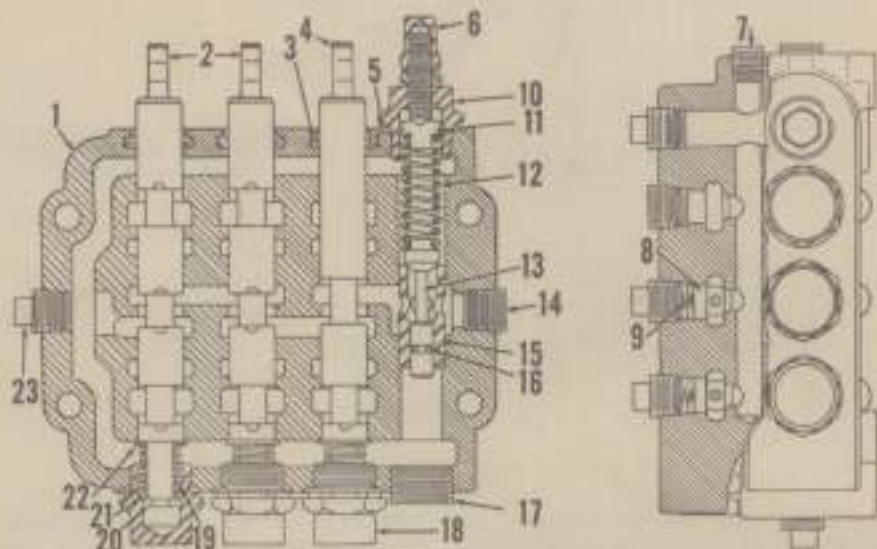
Cut-away view of early production 3-spool remote control valve (optional equipment). Single acting spool (4) is used in operation of tractor lift cylinder (See text). Note that check valve (8) is not used with single acting spool. Two-spool valve is similar.
